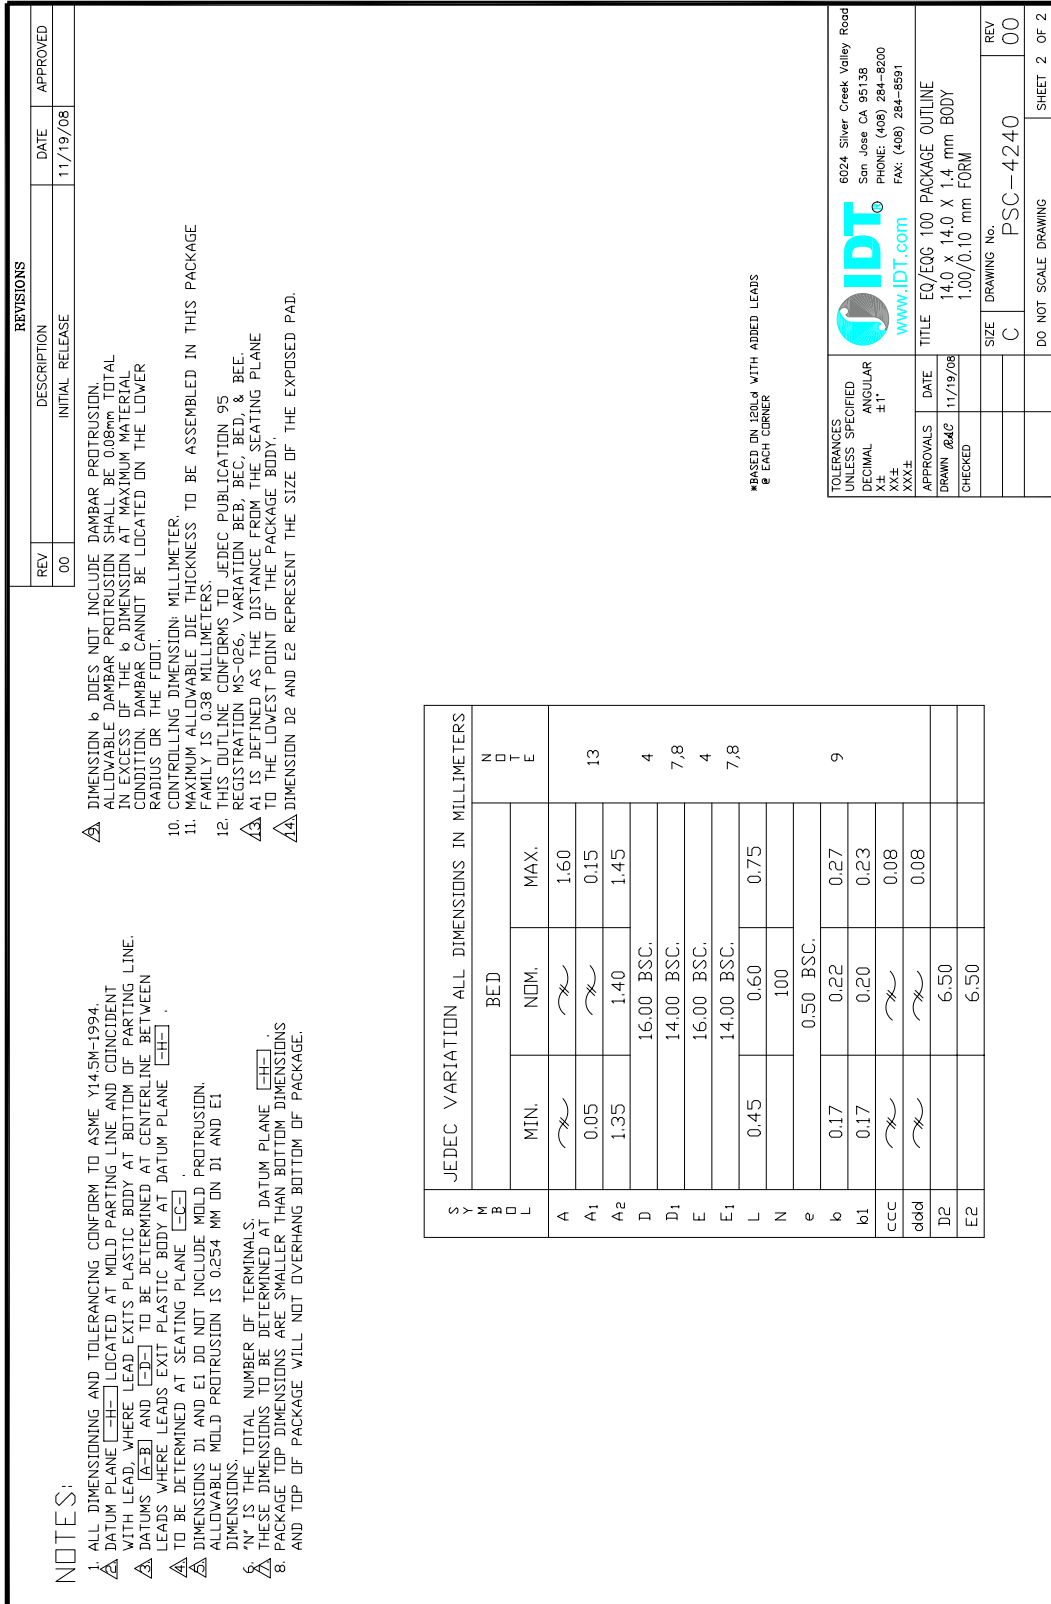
100-Pin EQG Package Dimensions (b) (in Millimeters)
